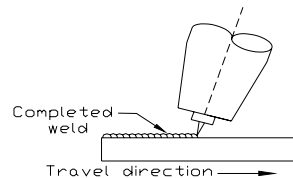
Backhand or pull welding technique. This technique requires more skill on the part of welder, since the weld joint is difficult to see because of the position of the gas nozzle.
